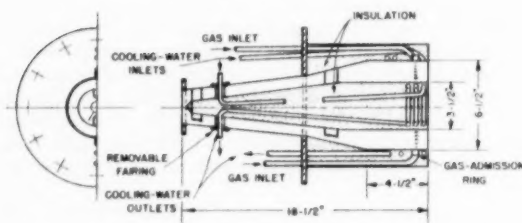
SECTIONAL VIEW OF PULVERIZED-FUEL BURNER
